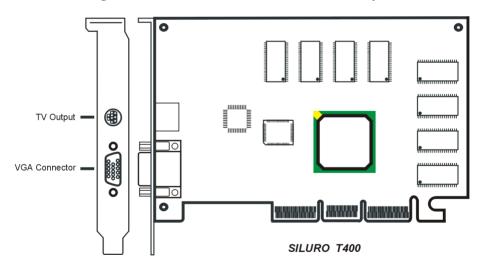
SILURO[™] T400 64MB SDRAM VGA/TV-Out Layout
